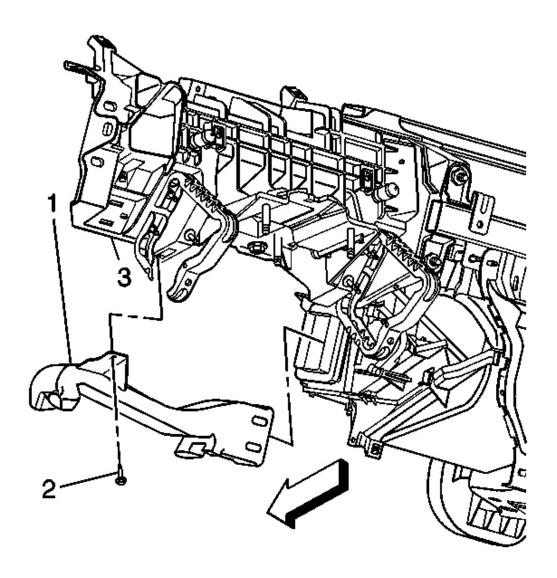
Removing/Installing Left Side HVAC Floor Air Outlet Duct Courtesy of GENERAL MOTORS CORP.
